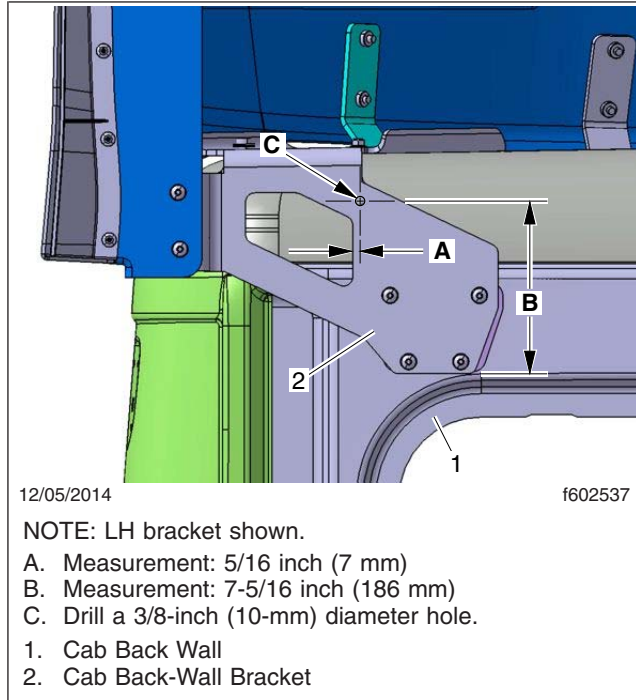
, Drilling Location on Cab Back-Wall Bracket
